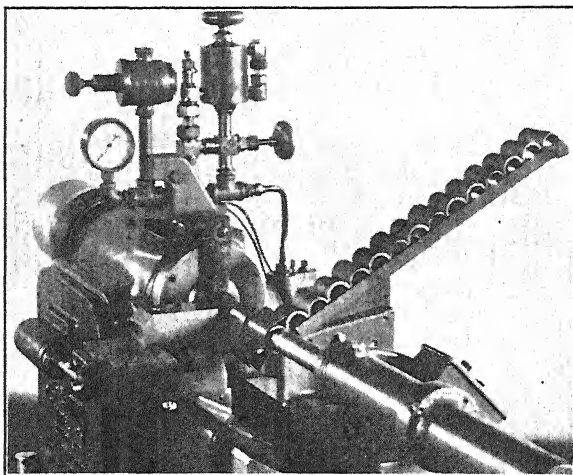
A Close-Up View of the "Lo-swing" Model "P" Automatic Lathe Setup to Turn Bushings.
